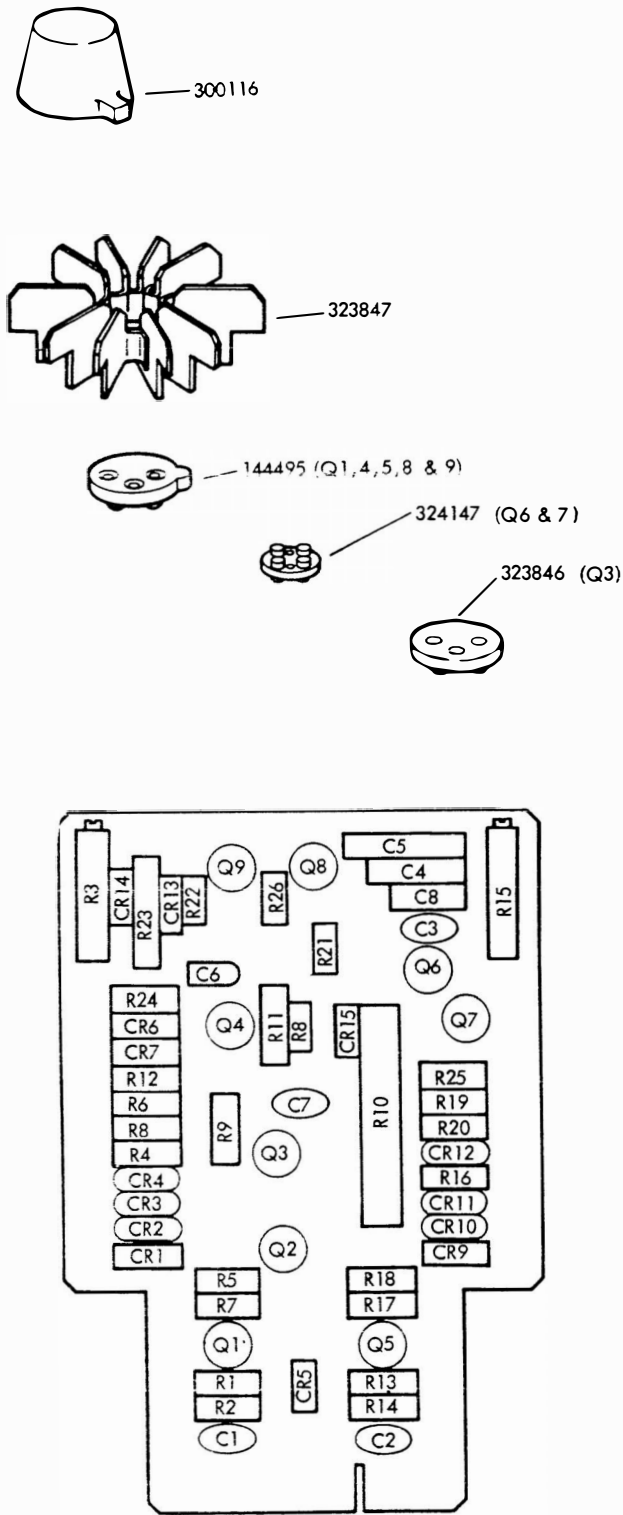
CIRCUIT MAGNET DRIVER MOUNTING COMPONENTS (3 Drawer Cabinet)
